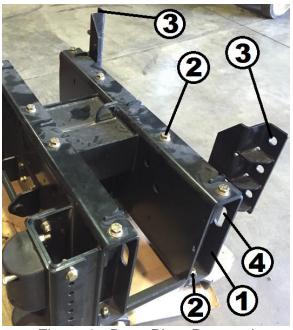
Base Plate Removal Key 1 – Base Plate Key 2 – ¾" Bolts Key 3 – Adapter Holes Key 4 – Lift Hole
